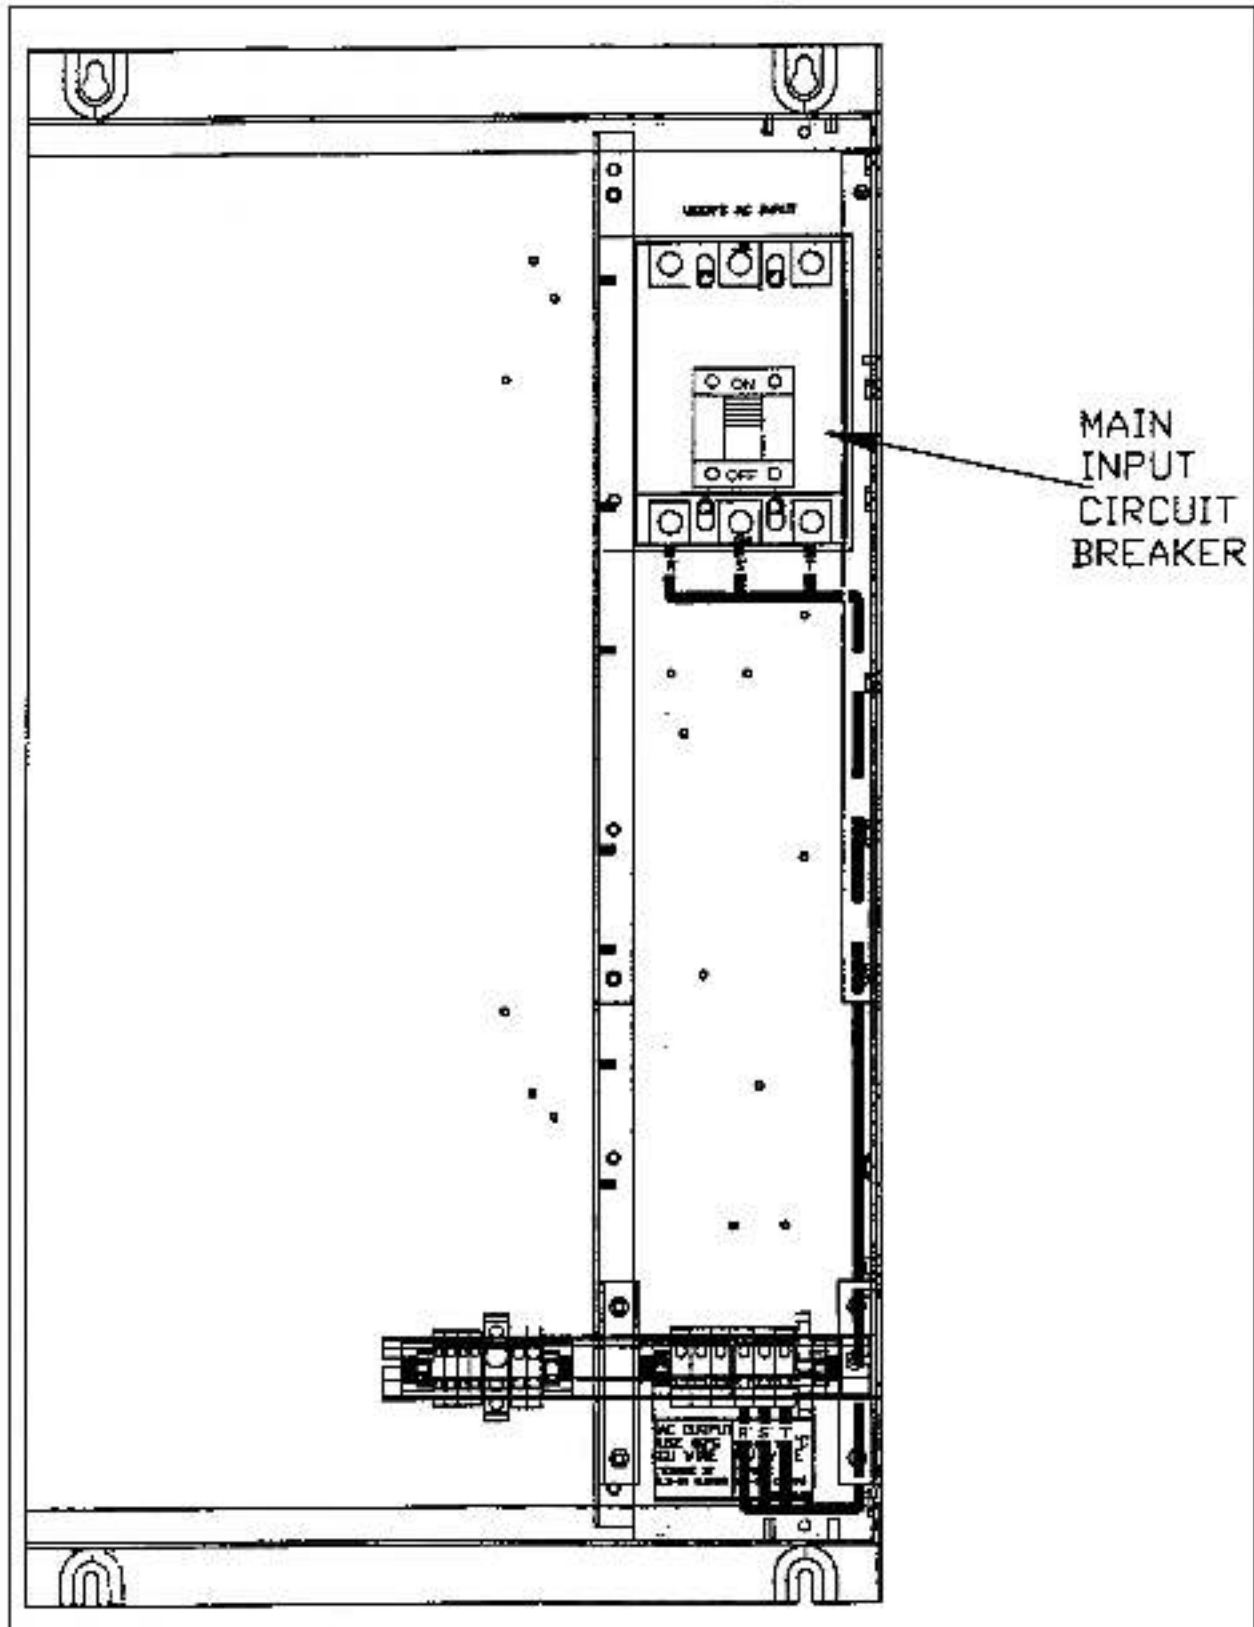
Circuit Breaker Mounting Location (1–20 HP GP2000 Mounted In an Expanded Cabinet Kit, 25–40 HP GP2000, or 1–50 HP VTAC V).
